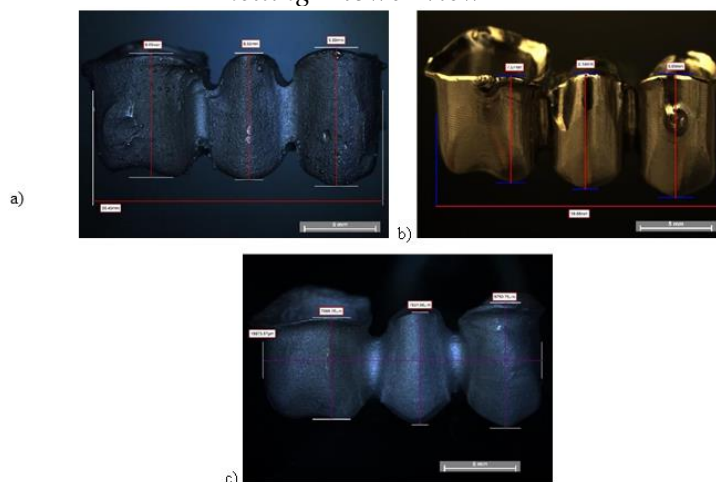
Macroscopic image representing the dimensional analysis of experimental samples obtained by: a) classical casting; b) milling; c) selective laser melting – side view
